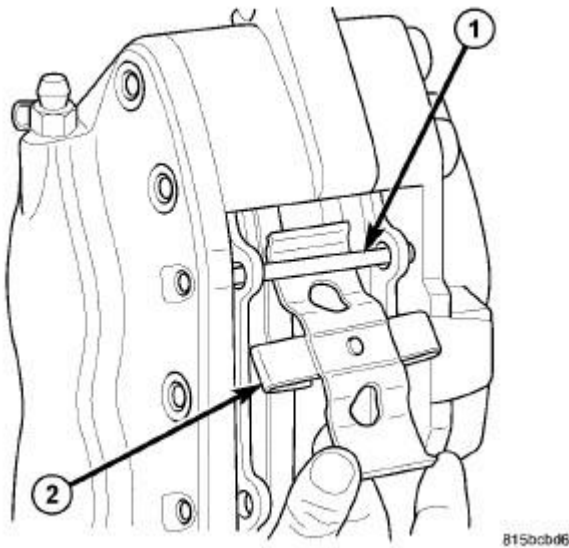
REMOVING/INSTALLING SPRING CLIP
